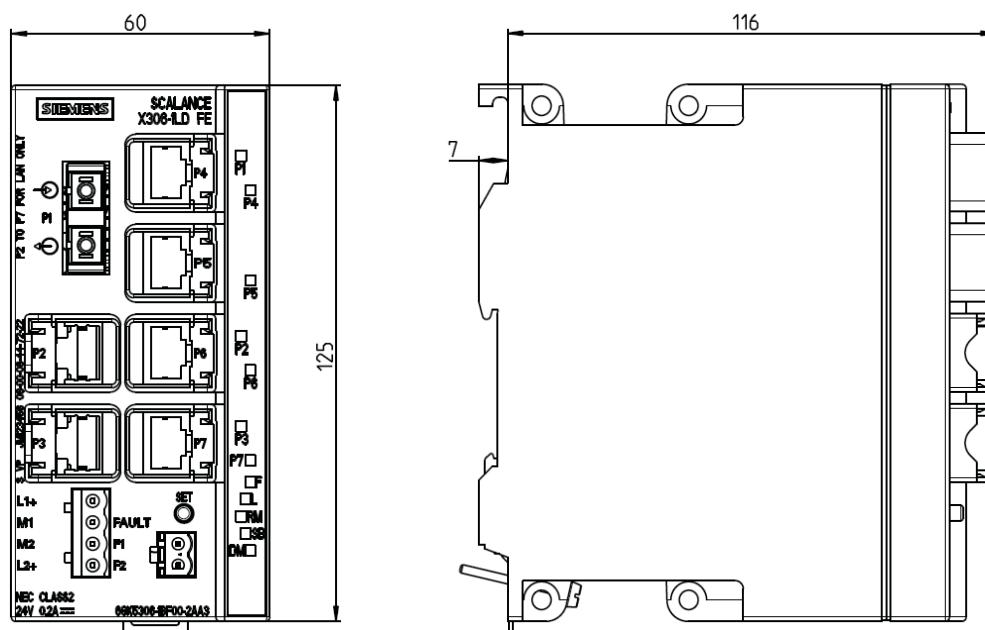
Small design dimension drawing (example used here SCALANCE X306-1LD FE)
